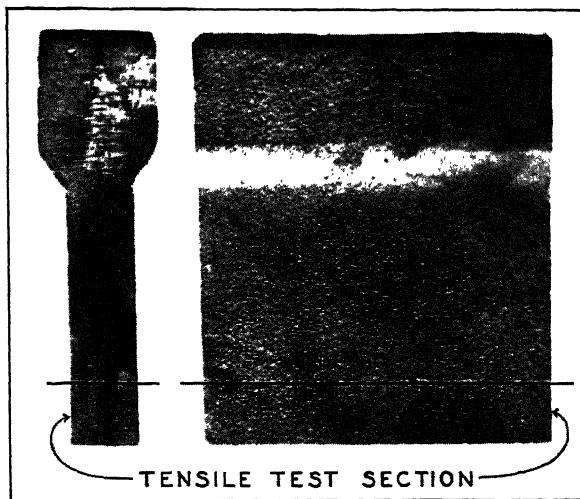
TYPE OF CASTING USED FOR CAST-STEEL TEST BARS. ALL SPECIMENS TAKEN FROM BOTTOM AS INDICATED.
